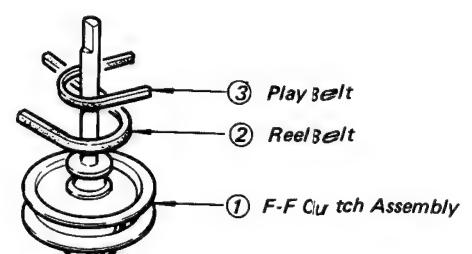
Fast-Forward Clutch Assembly and Fast-Forward Gear Removal
